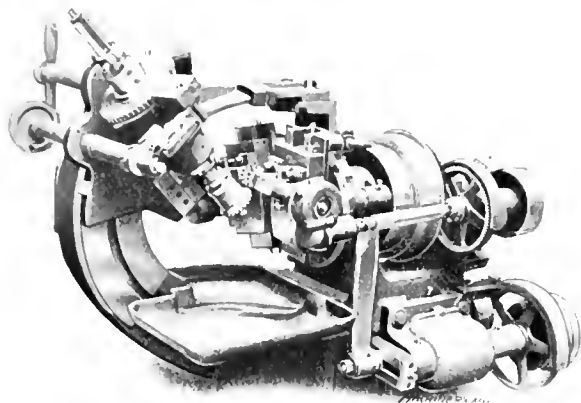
The Working Side of the Warren Machine showing the Milling Cutters whose Plane Surfaces represent Sides of Adjacent Crown Gear Teeth.
